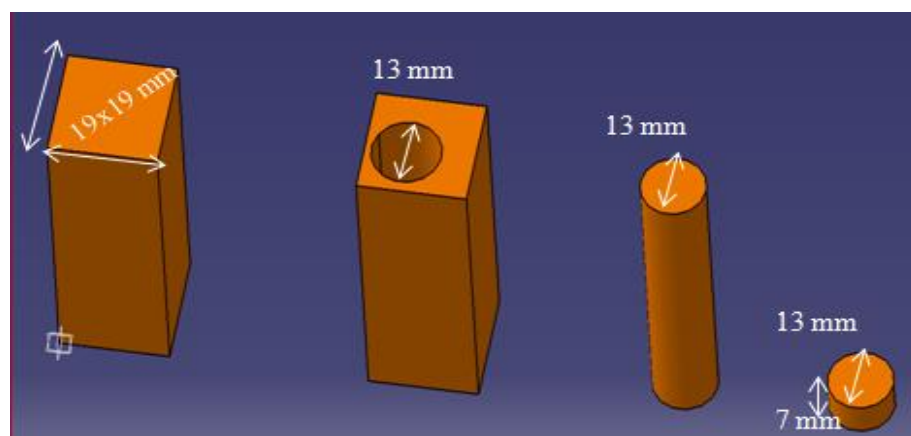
Preparation of Cu-W electrode using wire cut EDM
